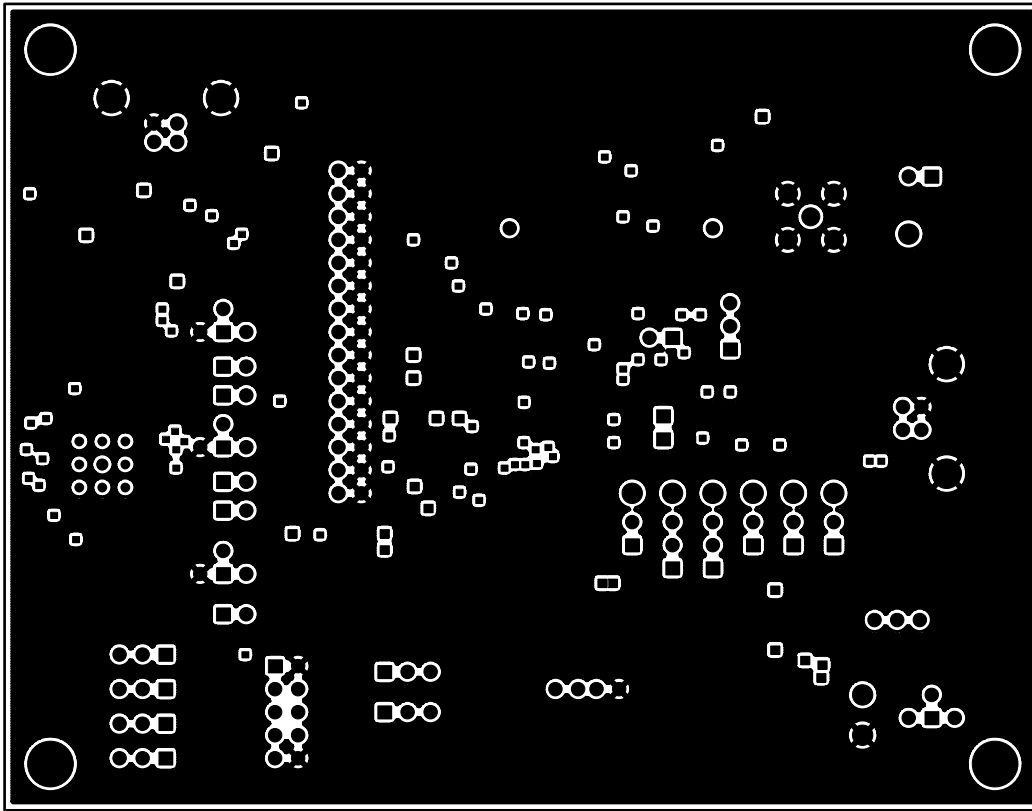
MAX14502 EV Kit PCB Layout—Inner Layer 2
